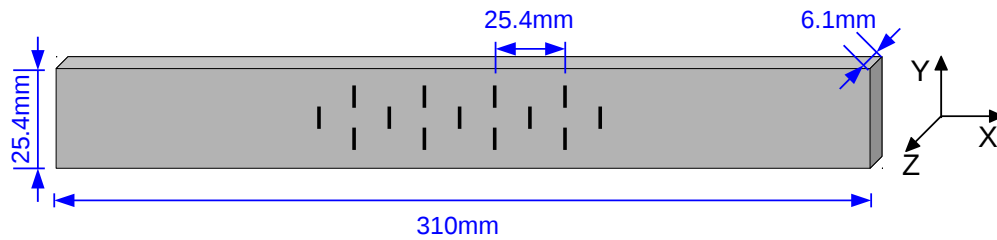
Specimen with multiple initial EDM notches and fatigue cracks. There are five center notches and eight off center notches on each specimen. Horizontal distance between the neighboring two notches is 25.4 mm and the vertical distance between two notches is 12.7 mm. Fatigue cracks were grown from these notches.
